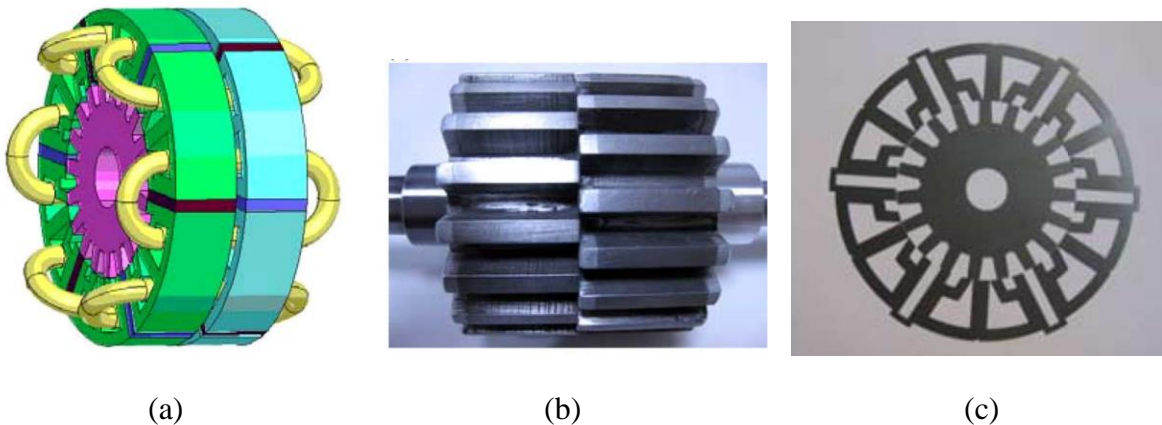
A six-phase multi-tooth fault-tolerant FSPM machine with twisted-rotor, (a) machine configuration, (b) prototype of the rotor, (c) prototype stator laminations [236].
